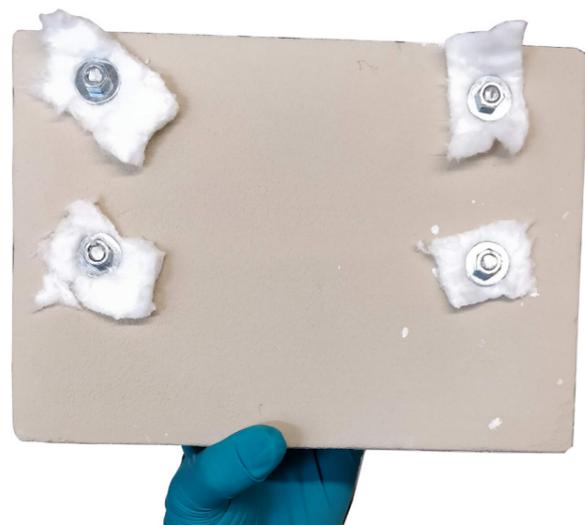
h: putting blanket around screws to avoid sticking of glass around screws during breakage of mould or overflow of glass.
